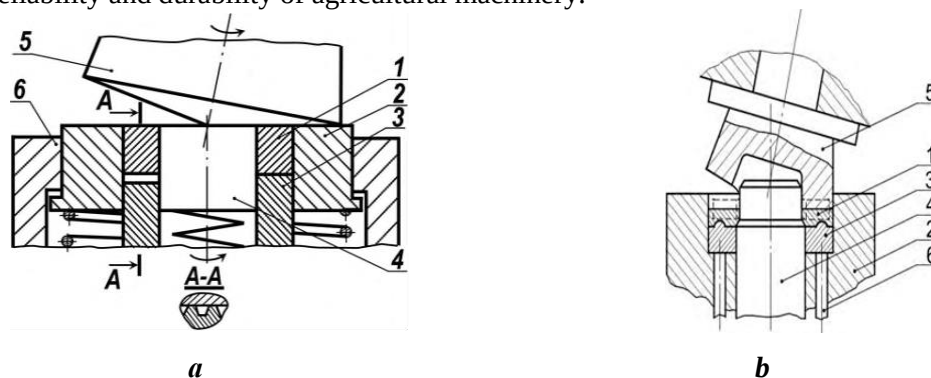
Schemes of direct shaping of the workpiece end face by the rolling stamping method: a – in a spring-loaded matrix-mandrel system; b – in a profile tool gauge.
